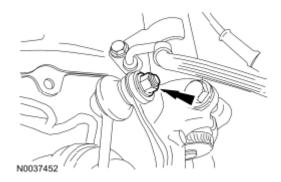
Locating Sway Bar Link Nut Courtesy of FORD MOTOR CO.
